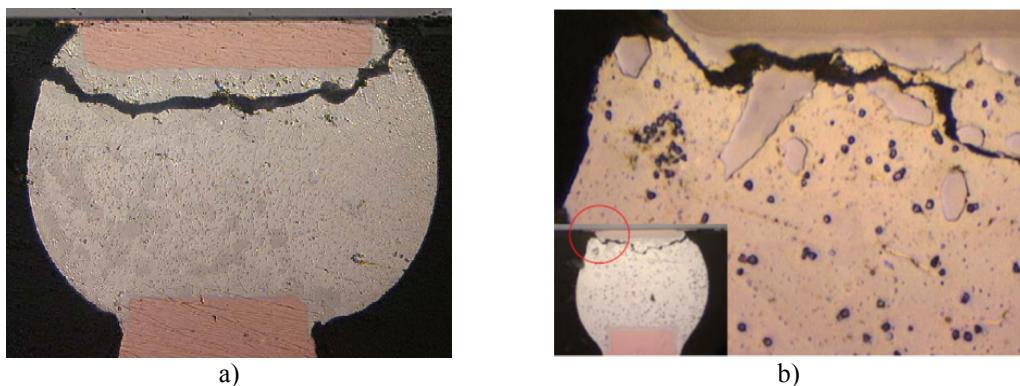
Micrograph of BGA joints failed by thermomechanical fatigue behaviour: a) Micrograph of failed BGA joint created by Sn3.5Ag solder; b) Detailed view to the failed joint interface Sn3.8Ag0.7Cu solder / intermetallic compound.
